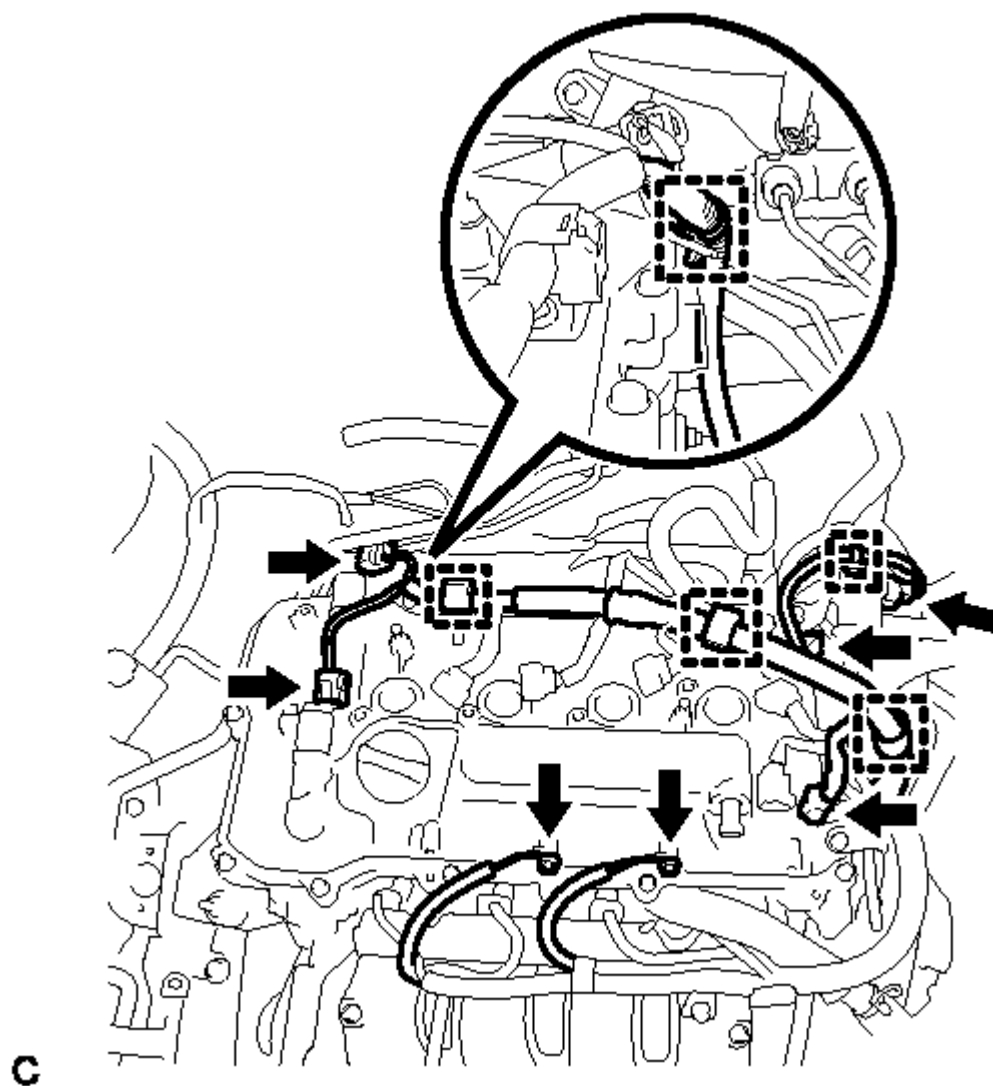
Identifying Engine Wire Bolts, Connectors & Clamps
